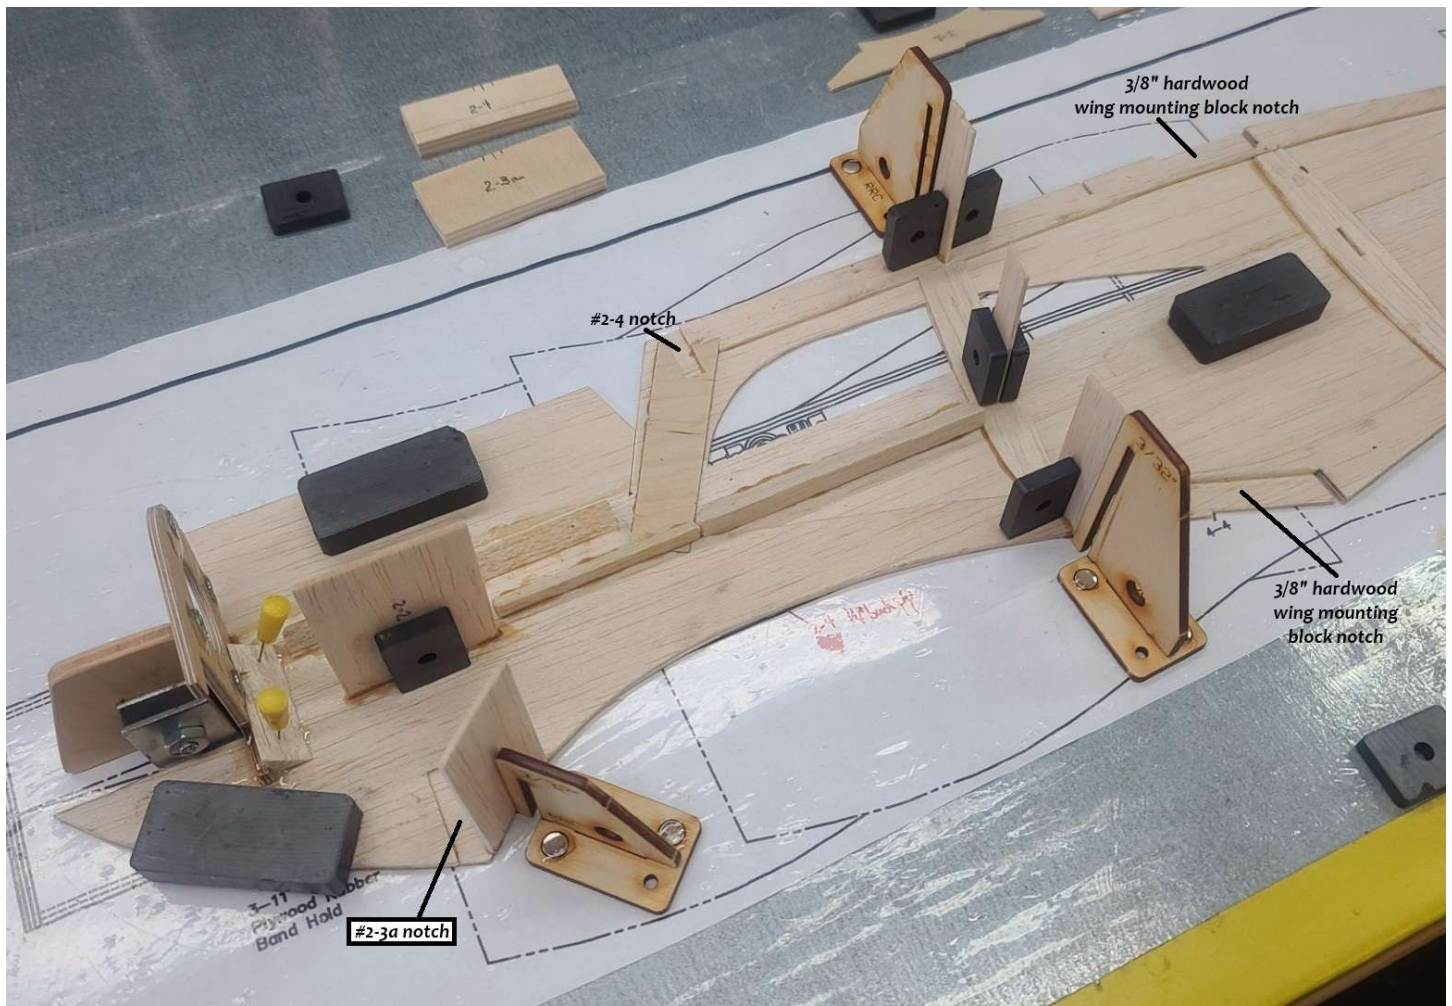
Fuselage Right Side - First Step in Fuselage Assembly
